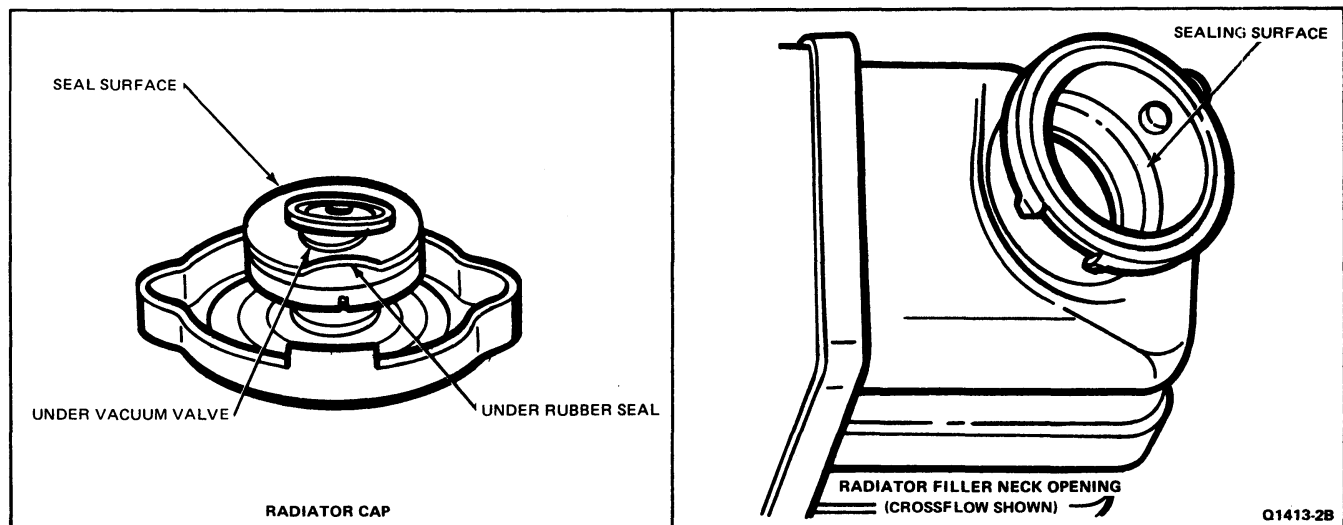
Cleaning and Inspecting Radiator Cap and Filler Neck Opening
